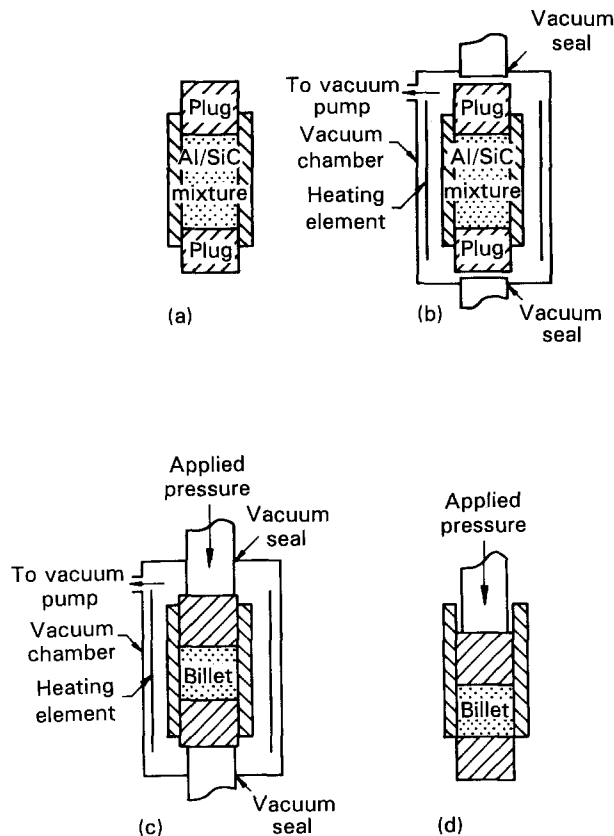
A schematic representation of the vacuum hot pressing; after [5]. (a) Load powder into VHP die and assemble; (b) heat mixture/die in vacuum, outgas; (c) compact into billet; (d) strip billet from die.
